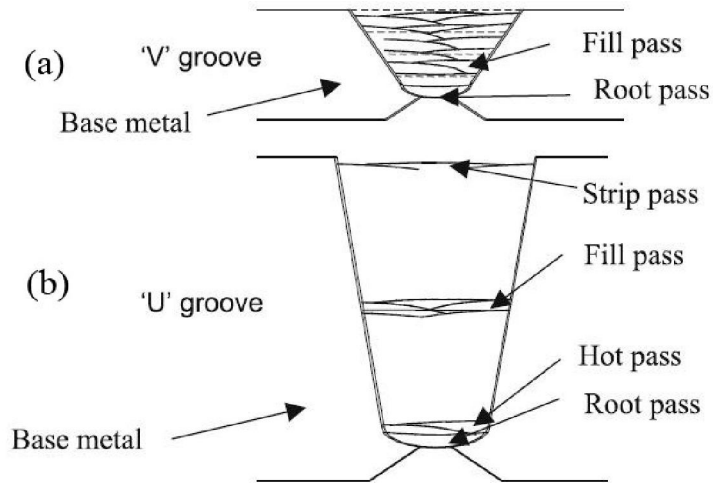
Type definition of weld groove, (a) V-groove (b) U-groove [30]
